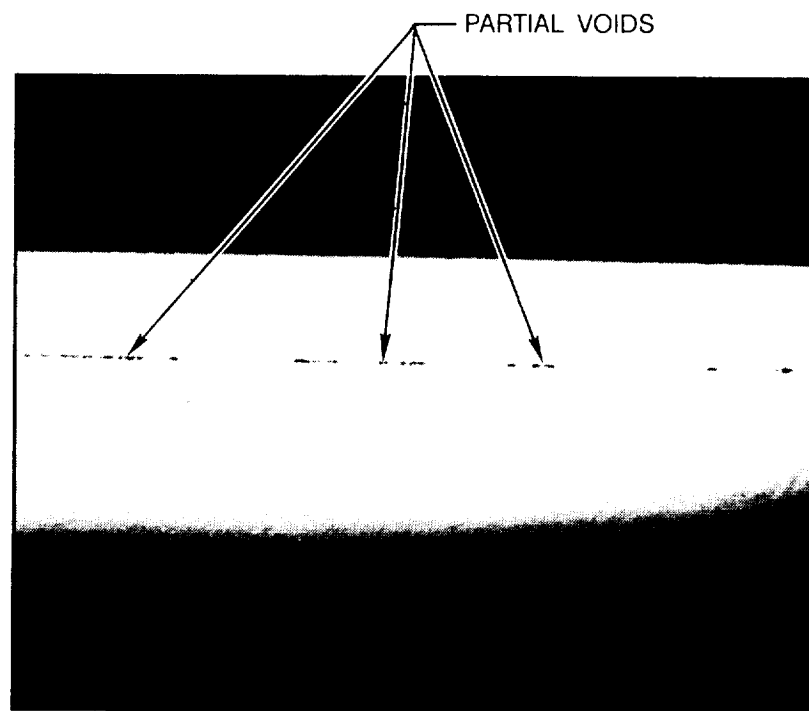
Grooved Flat Specimen (0.005-in.-deep and 0.025-in.-wide groove)
